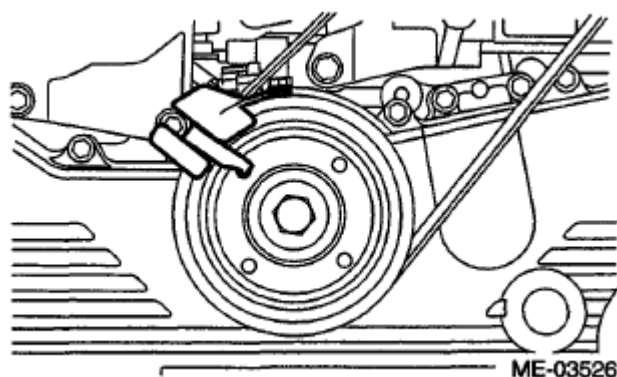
Identifying Belt Guide And Belt Guide Holder
